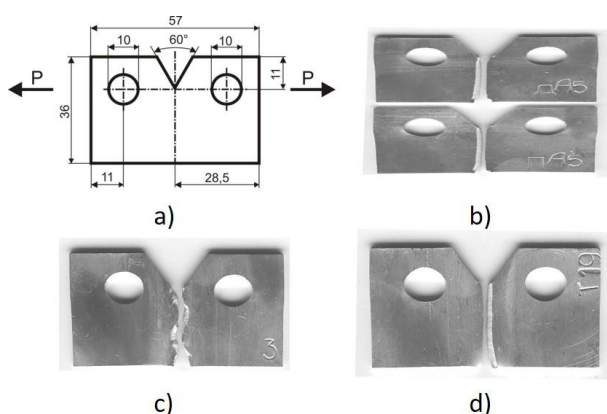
Sketch image (a) and tested samples of Kahn made of the base material (b) and welded joints of the AA5056 alloy obtained by GTAW (c) and FSW (d)
